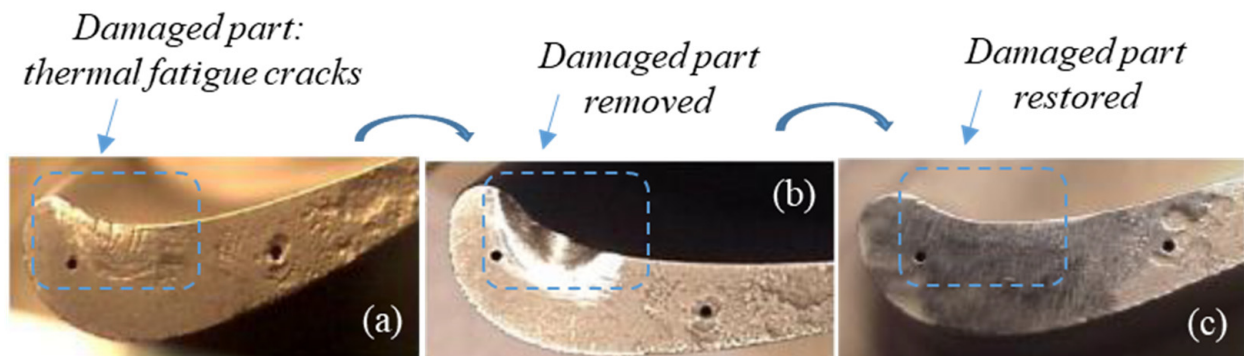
Repair of a turbine blade in single-crystal alloy using the ESD technique: (a) image of an as-received turbine blade showing the damaged area characterized by the presence of thermal fatigue cracks, (b) removal by grinding of the damaged part from the blade, and (c) restoration of the damaged part by depositing homologous material to the substrate [102].
